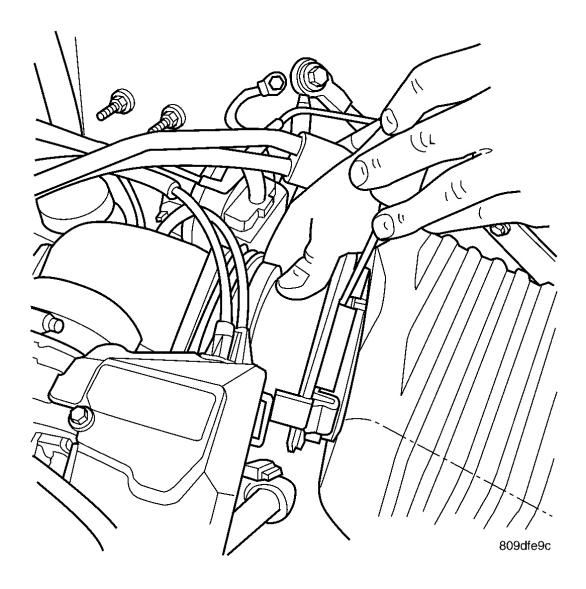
Removing Air Filter Inlet Hose Courtesy of CHRYSLER LLC
